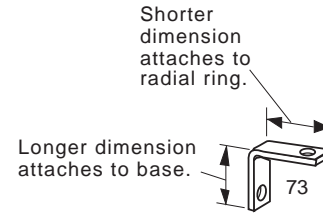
Figures A through D show the steps for radial ring assembly. Refer to the parts table below for the parts required in this step. Slide the two radial rings (74) onto the base assembly (BA). Note the orientation of the ring slots. Attach the rings to the base using the radial ring brackets (73), 2 1/2" screws (232), 1/2" screws (79) and lock nuts (87). Leave hardware loose until Step #2. Note the proper orientation of the radial ring brackets in Figure A. Install ground strap (428) as shown in Figure D.
